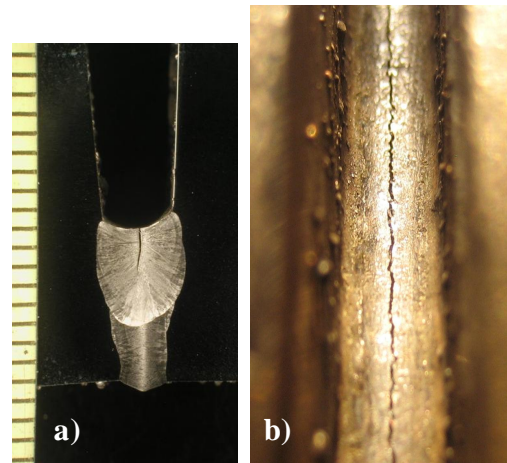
a) Macro cross-section showing hot cracking propagated into the surface of the first filling pass. b) The top view from the Figure 14a showing hot cracking along the weld length.
